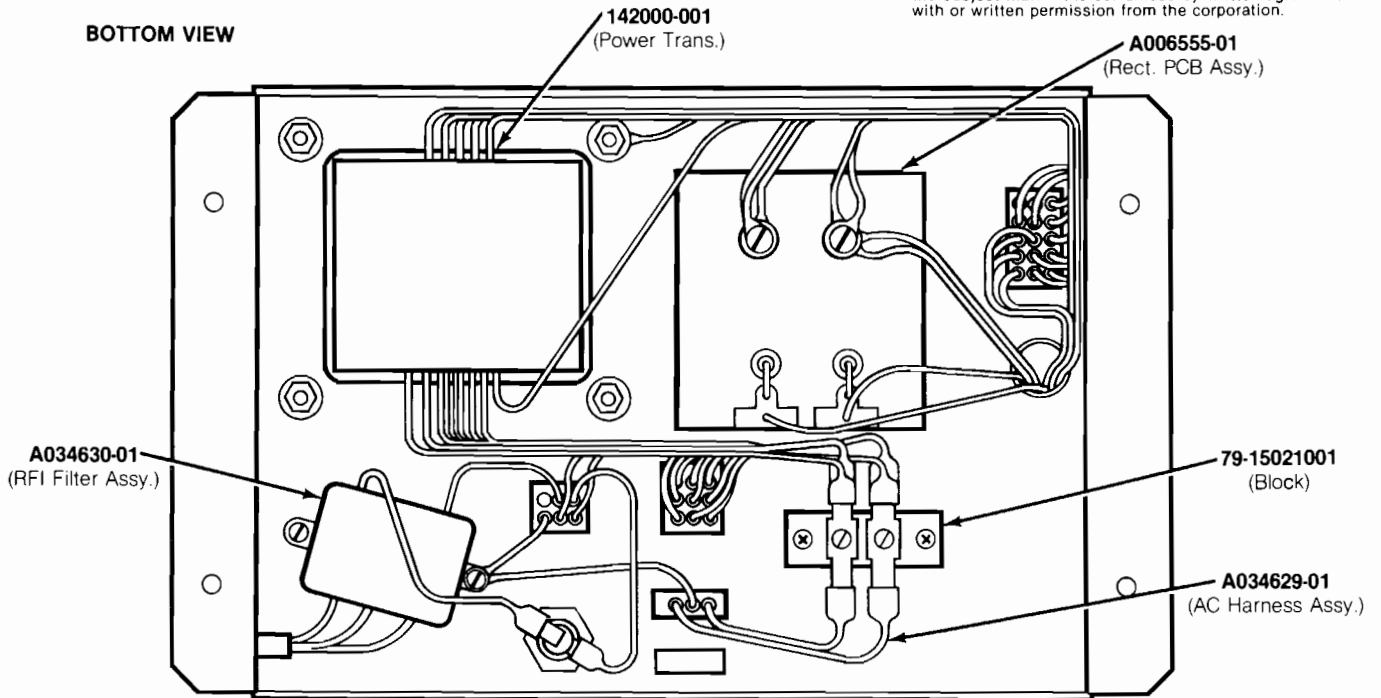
Power Supply Assembly for Color Raster-Scan Games
